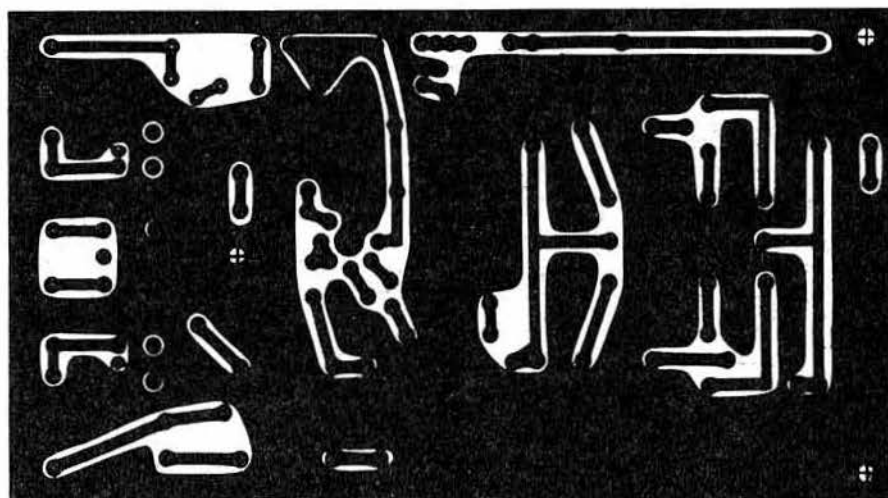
PCB layout of Fig 6. PCB 4.5 by 2.5in double-sided
